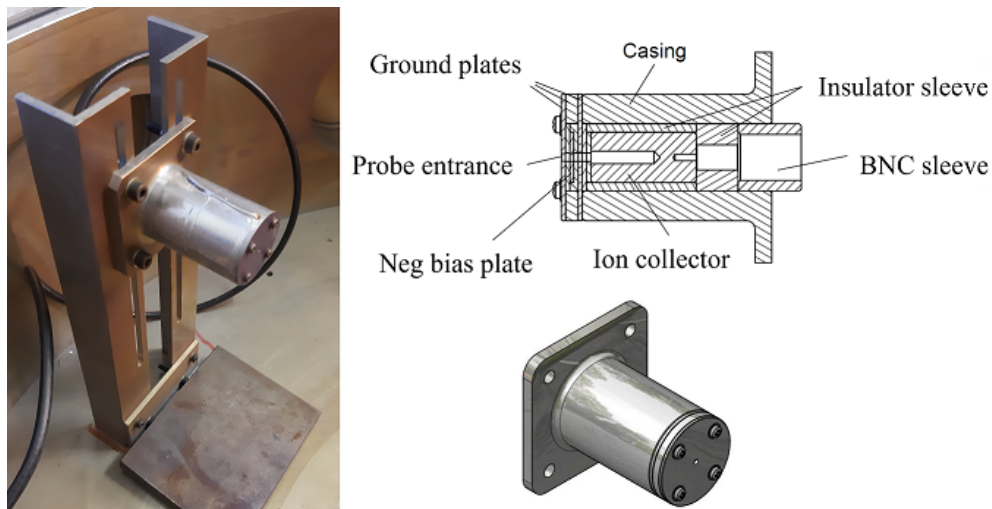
Faraday cup set up within the vacuum chamber and engineering drawing for the design.
